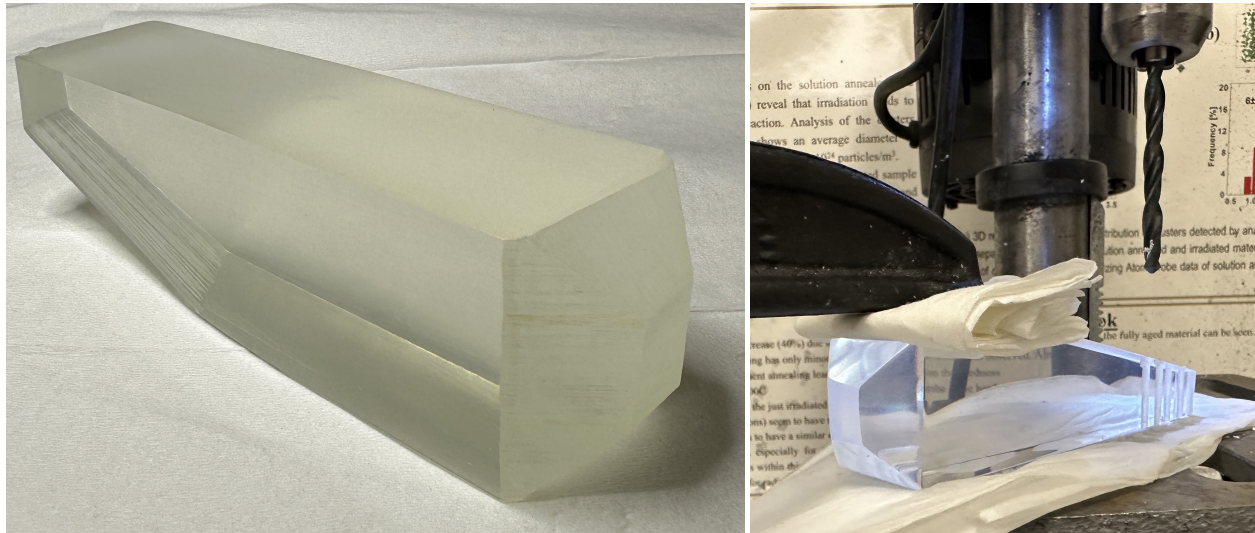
Left: Photo of PSD plastic cut to structural sUAS component geometry. Right: Photo of drill pressing motor bolt holes into PSD plastic scintillator component
